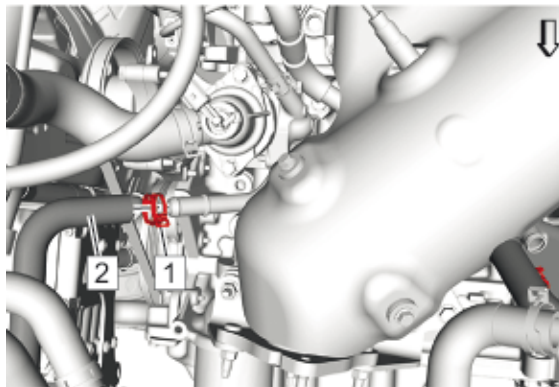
Heater Water Auxiliary Pump Inlet Hose And Clamp
